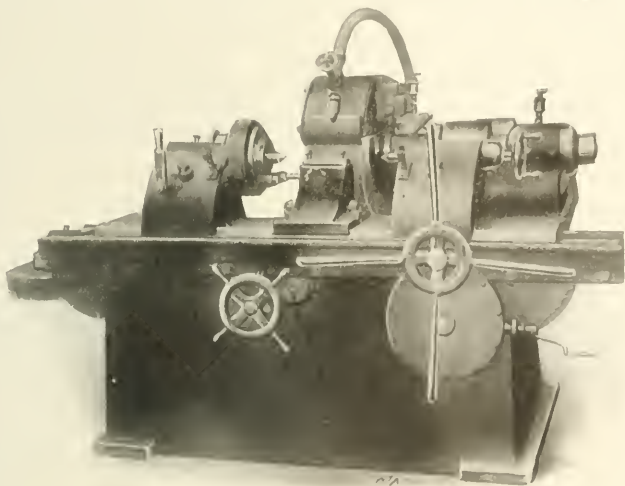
Bridgeport Grinding Machine with Wide Faced Wheel
